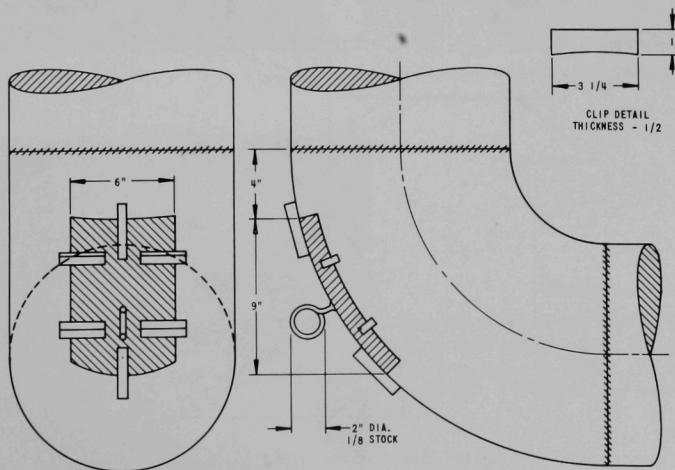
Dimensions of Cutout Section on 12-in. Elbow
